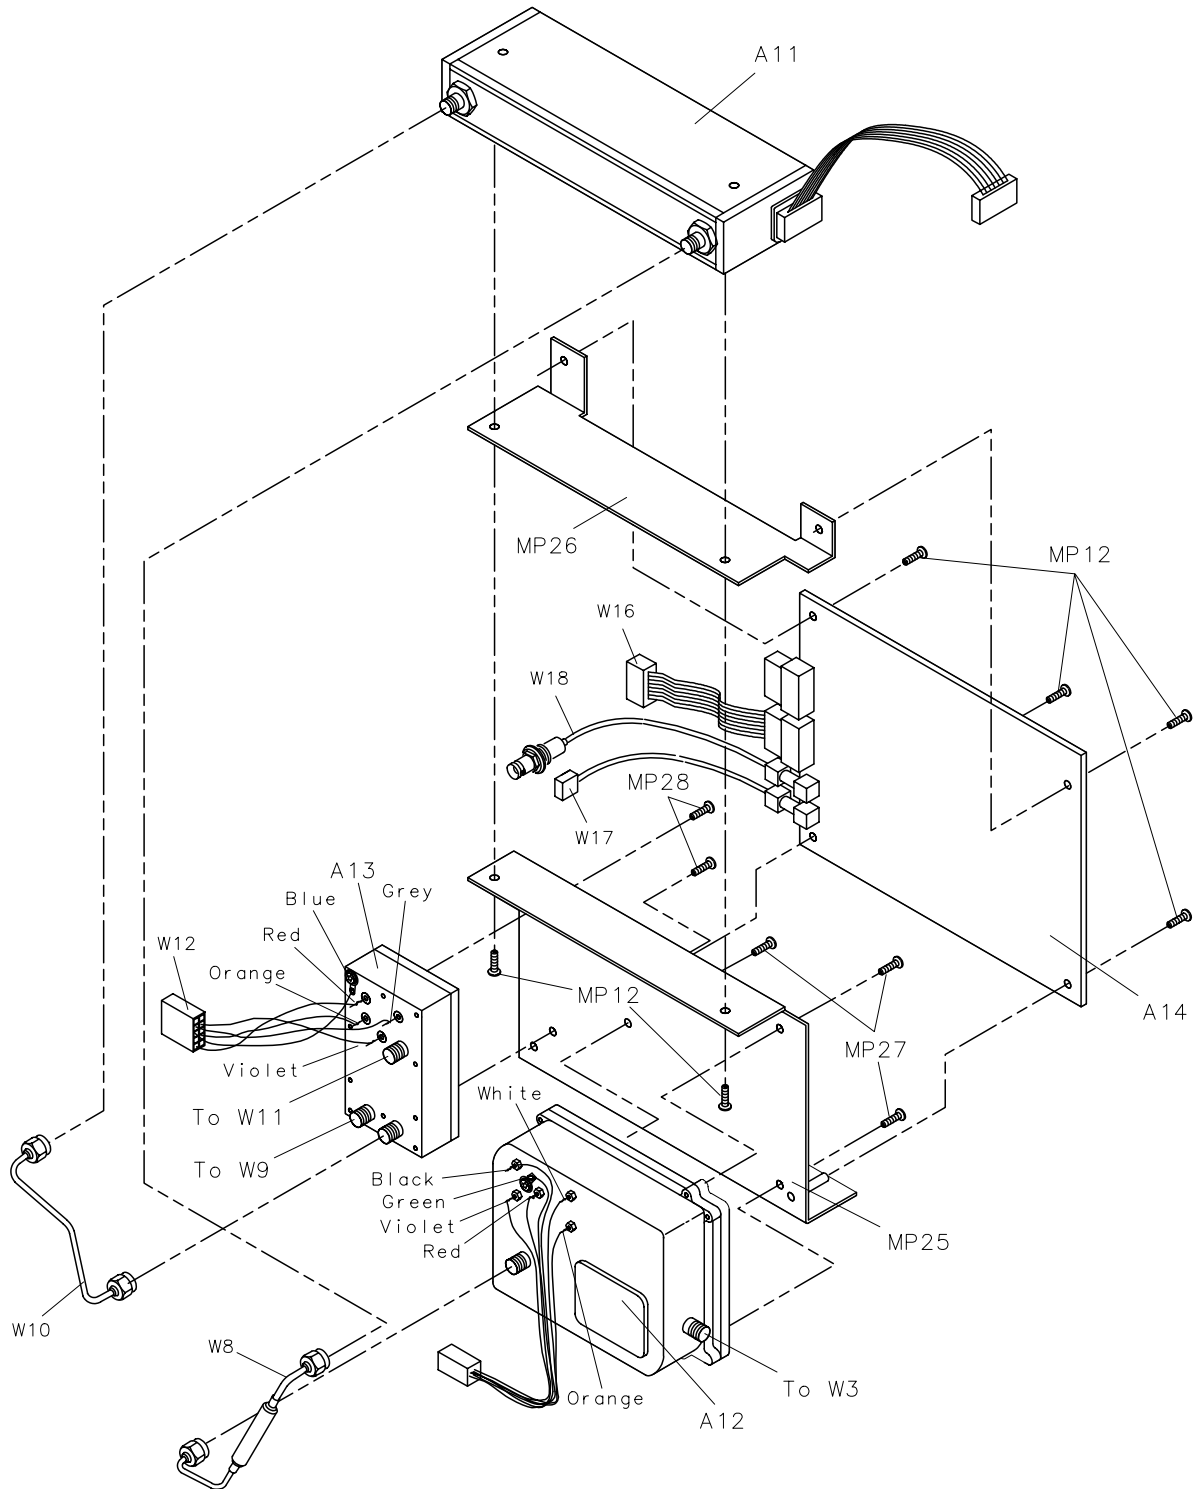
8648B/C/D Replaceable Parts - A11/A12/a13/A14 Detailed View
